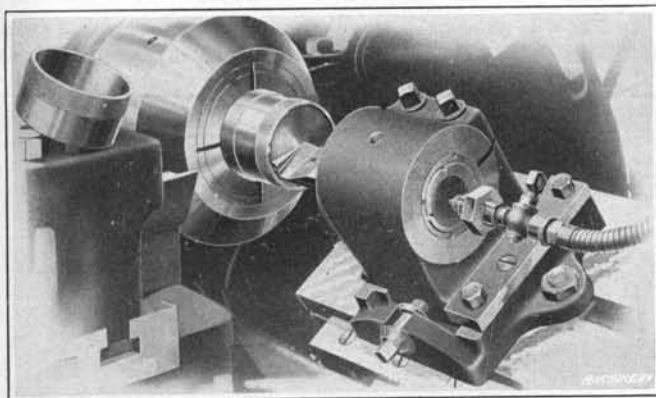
Set-over Tool-holder in Operation on 3-inch Hole
